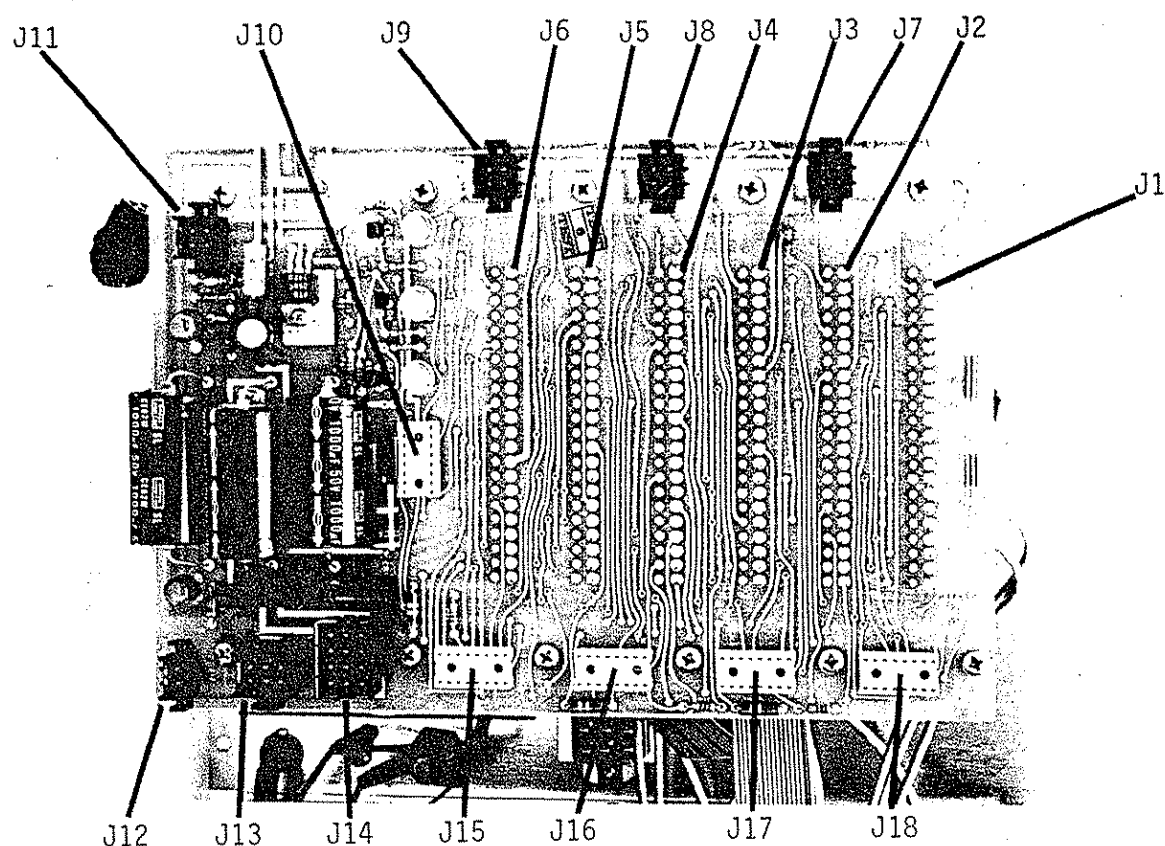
BOTTOM VIEW, COVER REMOVED
